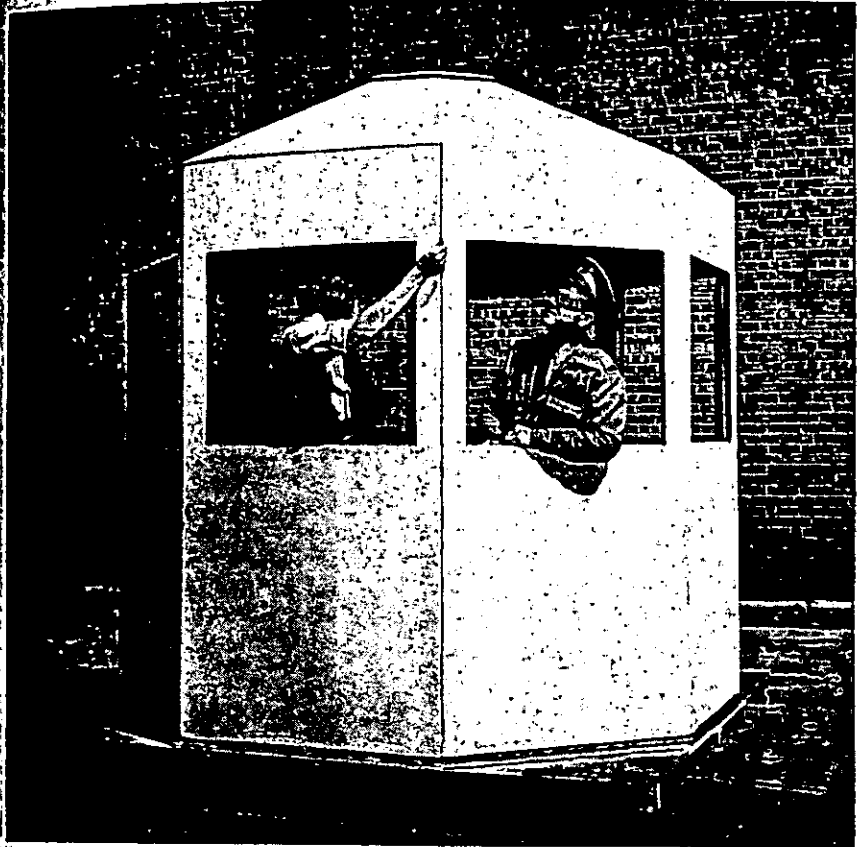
The prototype cupola. Each prefabricated flanged panel comprises a wall and roof section as one segment. The panels are formed from fiberglass and polyester resin in a hinged mold that has a steel insert for the window opening.
